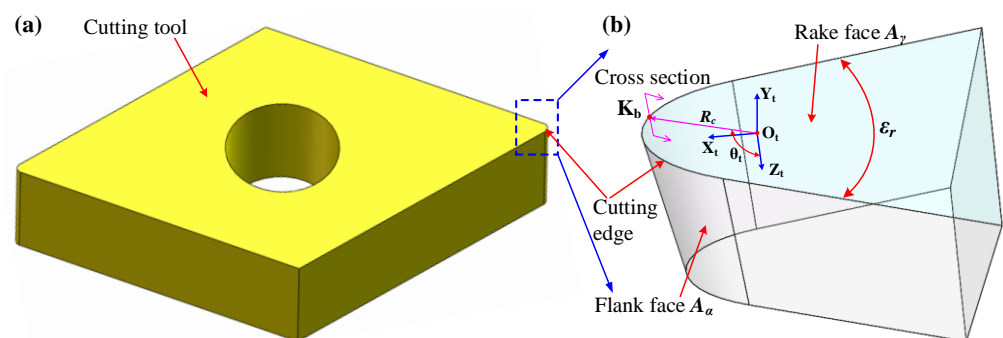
Illustration of the tool geometry model: (a) the whole cutting tool; (b) the tool geometry model to be established.
